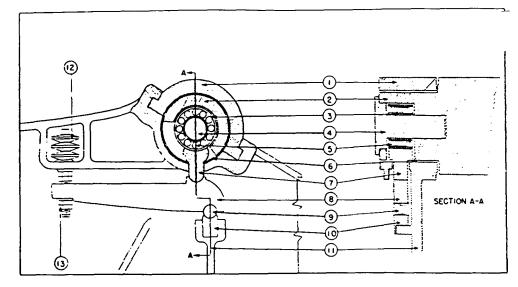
6-inch gun barbette carriage M1900, pedestal type.
